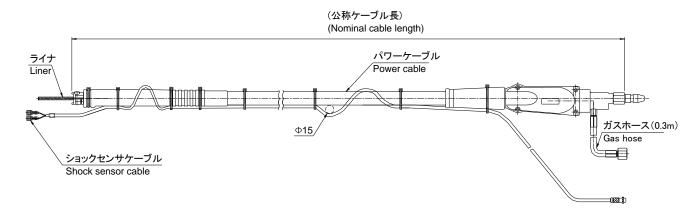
Outline drawing of the coaxial power cable(L-11641~L-11655)
